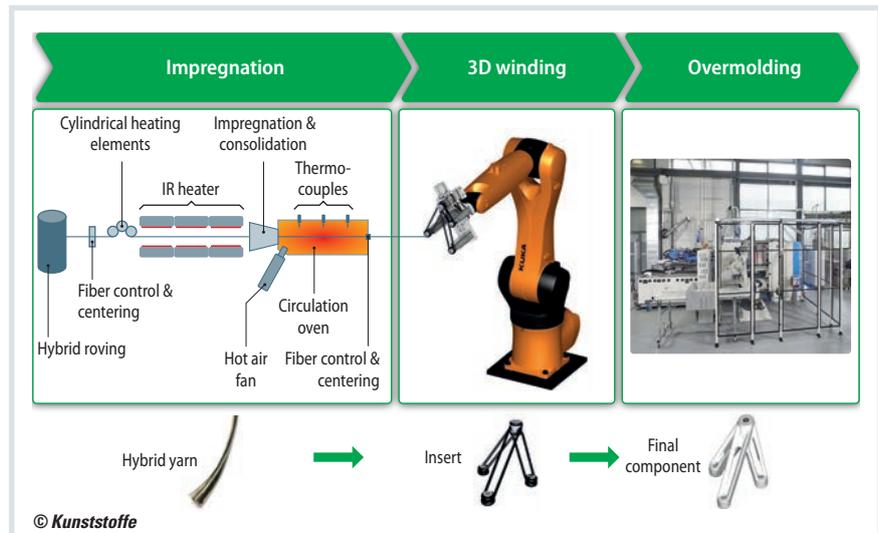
The three-step process chain of the 3D skeleton winding technology. A 6-axis industrial robot places the molten hybrid yarn around the load application elements (source: Fraunhofer ICT)
